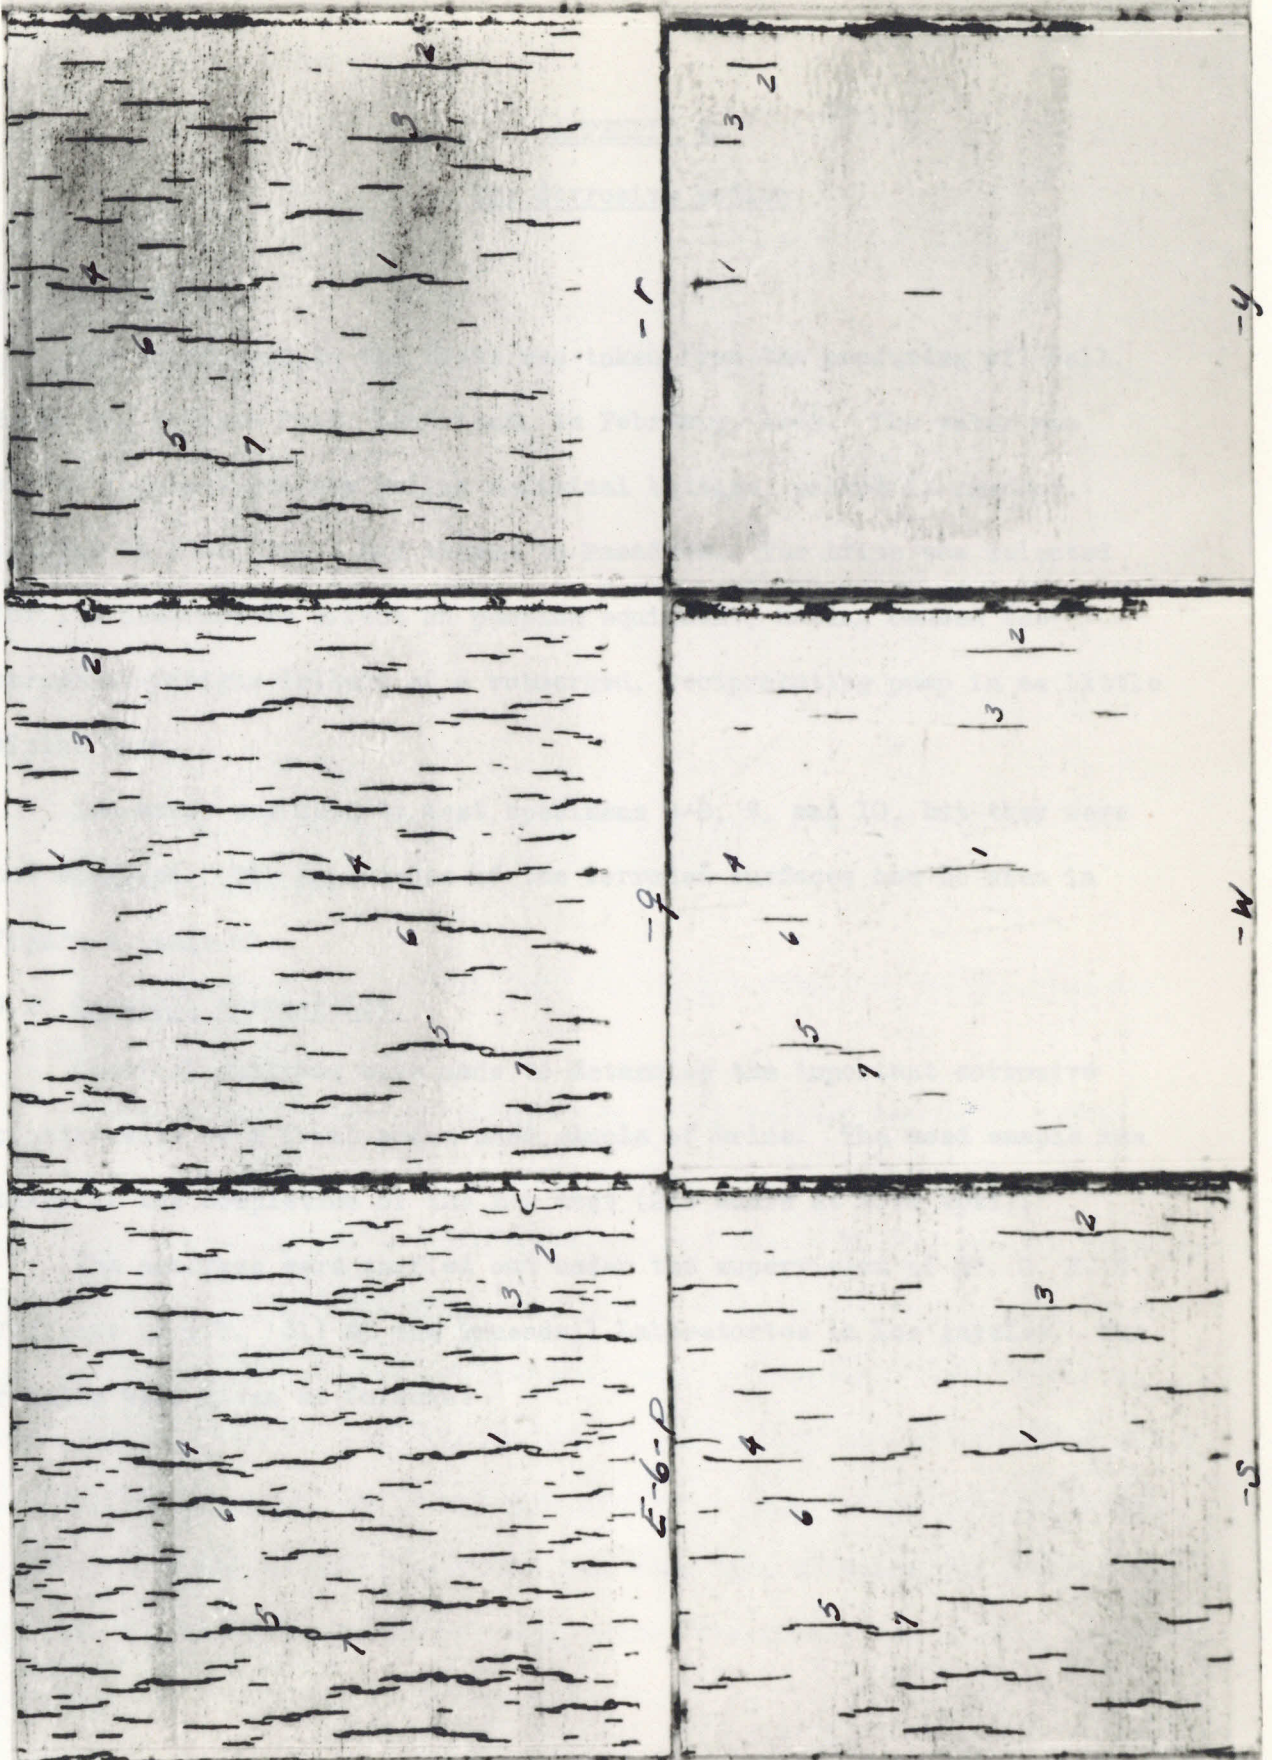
Enlarged (3.8X) Photographs of Sulfur Prints as Used for Analysing. Prints E-6-p, q, r, s, w, and y.
